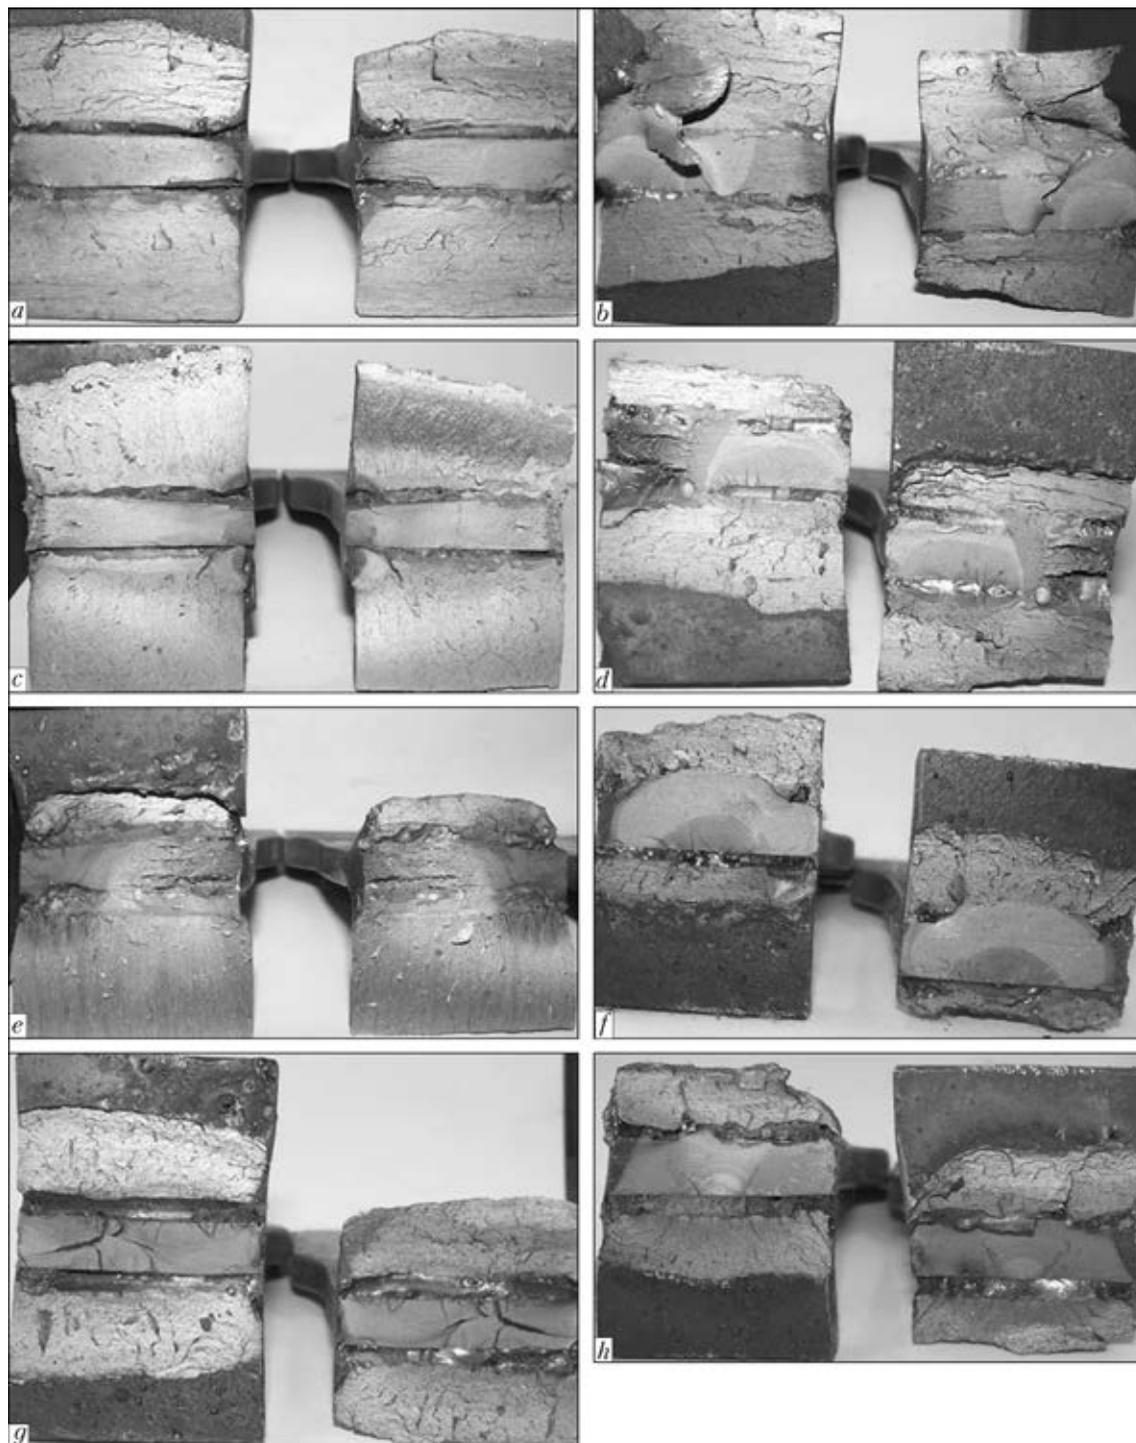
Fatigue fractures of welded T-joints with lack of root penetration: *a-h* — specimens 1–8, respectively
